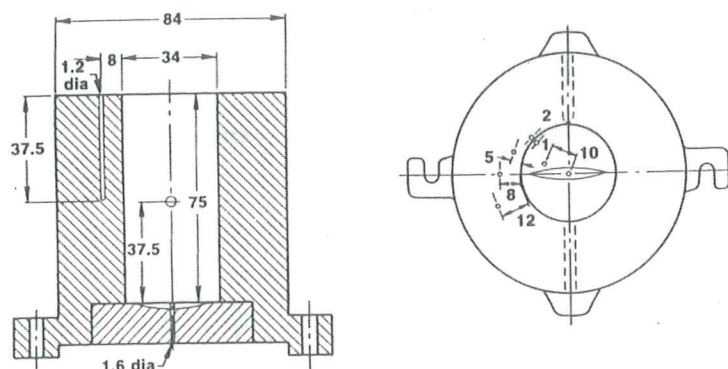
Cylindrical aluminum solidification test; geometry of the experimental apparatus and location of both thermocouple and displacement transducers
